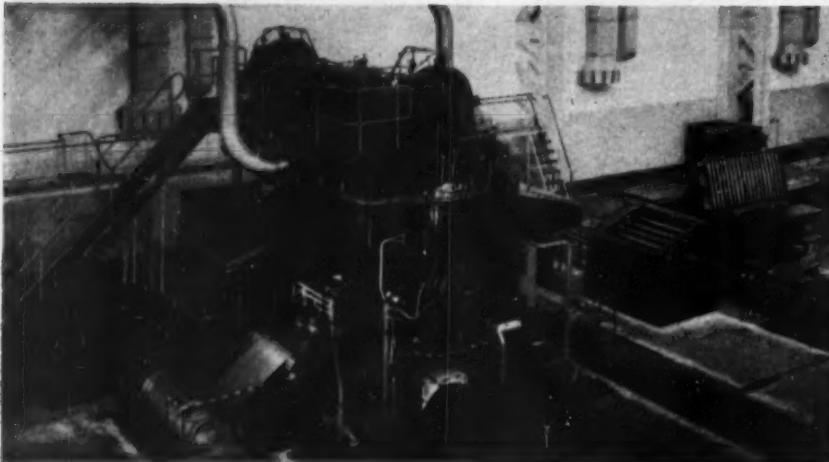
56-in. cold-rolling mill for transformer sheet and strip complete for coil rolling
